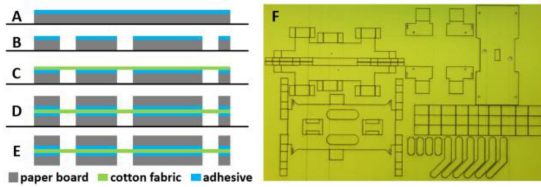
(a) A paper board with the adhesive on it. (b) The 1st laser cut for flexure joints. (c) Locate the cotton fabric. (d) Locate the equal paper board with the adhesive (GBC Octive Hot Mount) and align the position of the flexure joints. (e) Lamite the whole layers together (120°C). (f) The laser cut MutBug before folding and assembly.
